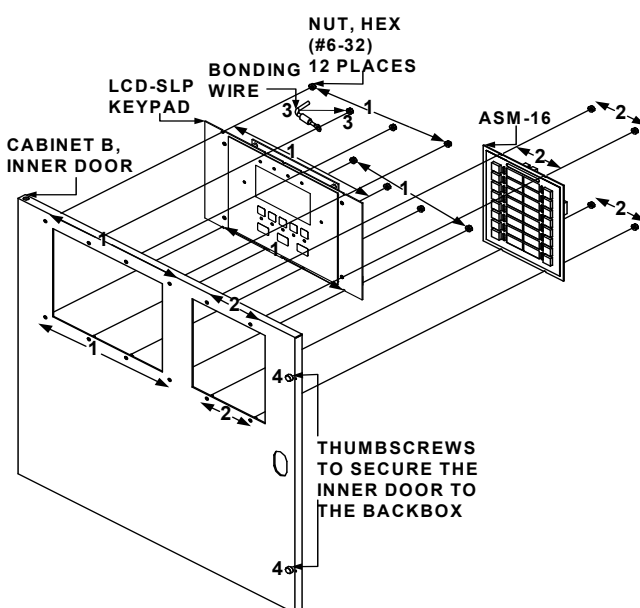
LCS-SLP to the Cabinet B Inner Door Installation
